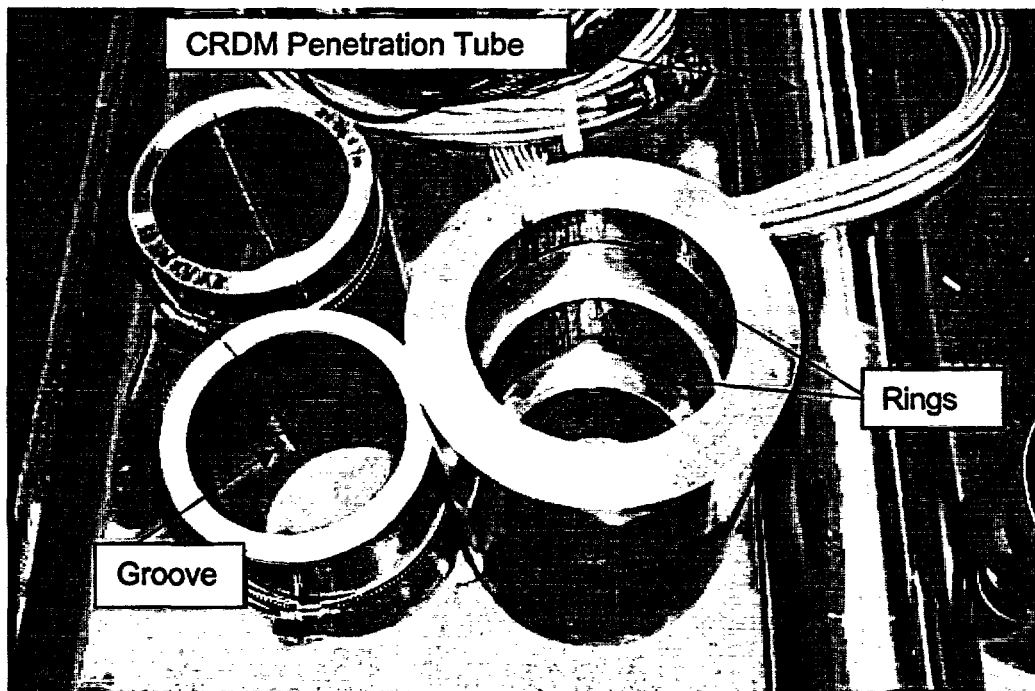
Machined samples used in this evaluation. The samples SK-WB08-1 through - 4 are shown clamped together. The penetration tube was used in the test stand.
